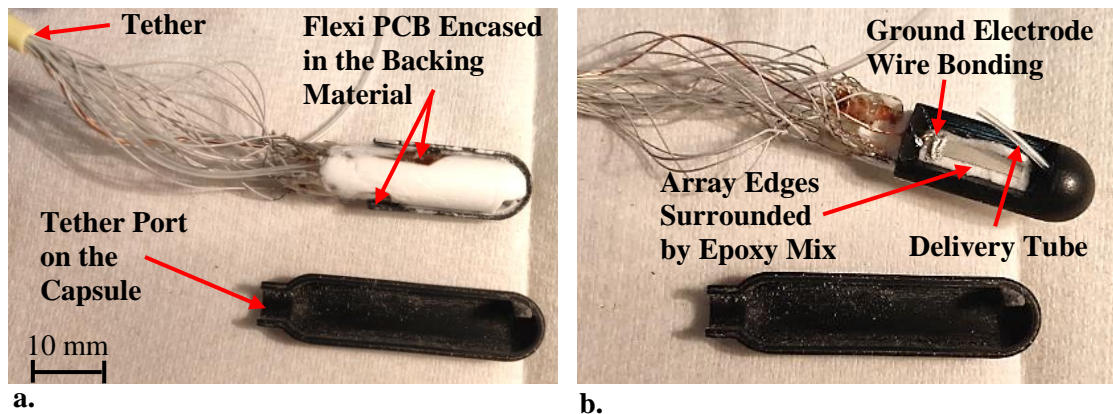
Capsule Assembly: a. View of the Cured Backing Layer and Encased Flexi PCB; b. Capsule Top View Showing the Cu Wire Bonded to the Ground Electrode and Array Lateral Edges Surrounded by Epoxy
